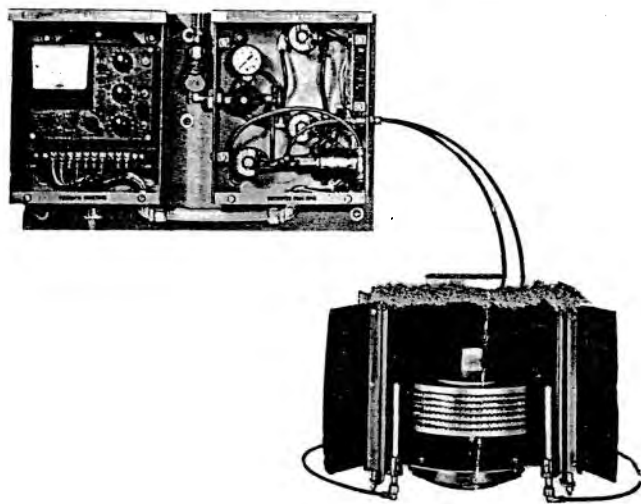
Water injection unit; spray heads (lower right) mounted in the rasp exhaust hood apply water to the rasp (B and J Manufacturing Company, Glenwood, Ill.).
